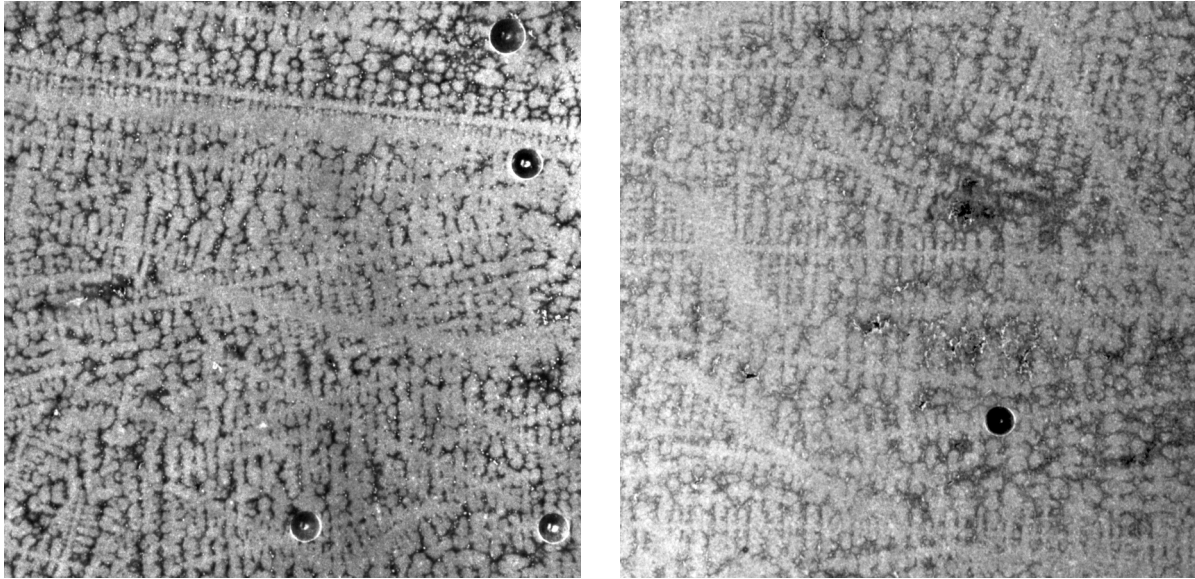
35mm (center) Casting #1 (left), Casting #2 (right) macro
